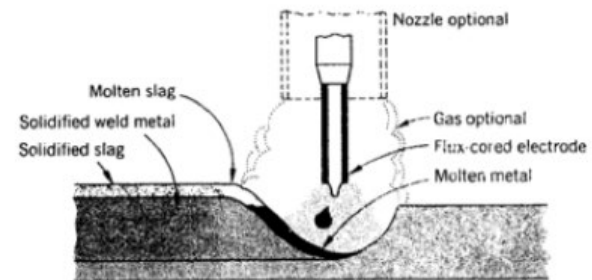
Flux-Cored Arc Welding, FCAW [26]
